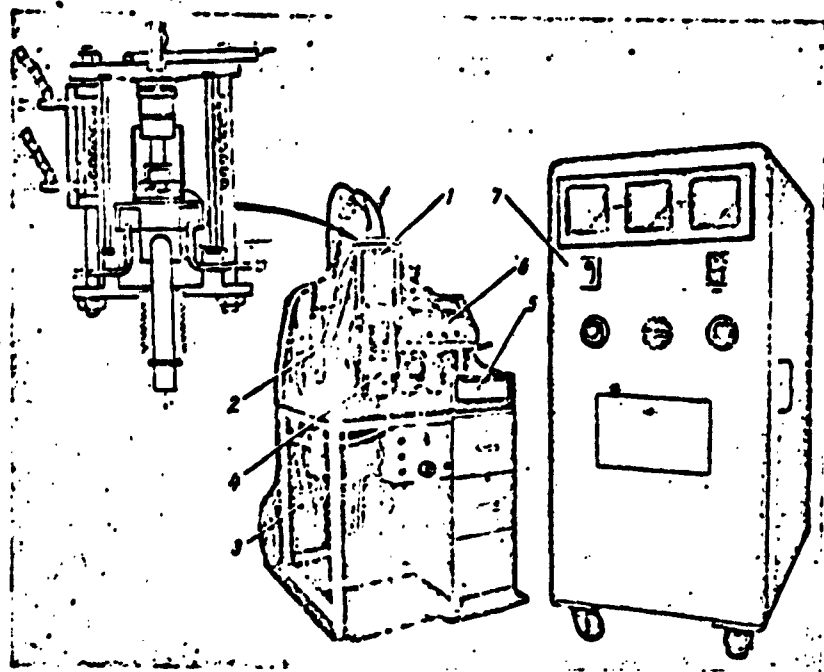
Apparatus for diffusion welding of small parts in vacuo. 1) Vacuum chamber with volume of 1.7 dm^3 ; 2) type TsVL-100 oil-vapor pump; 3) type VN-461 mechanical pump; 4) 4-ton hydraulic press; 5) type MPSchPr-54 millivoltmeter for measuring temperatures to 1300° ; 6) type VIT-1 vacuum gauge; 7) type IO60-012, 8-kw high-frequency generator.
